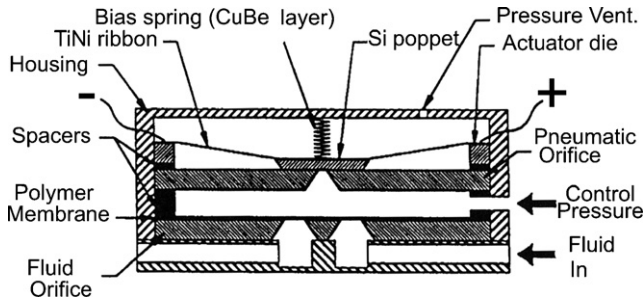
Micro-valve with SMA actuator (Ti–Ni ribbon) (adapted from [6]). The valve is shown in its closed configuration. Dimensions of the assembly are 5 mm × 8 mm for a thickness of 2 mm. The film thickness is a few micrometers.
